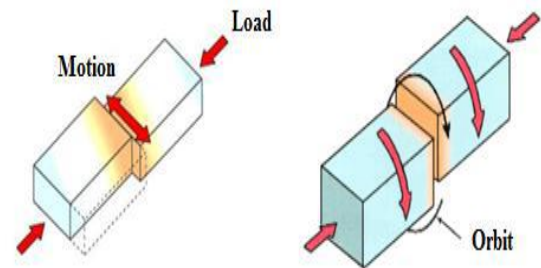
Schematic diagram of Linear and orbital friction welding
